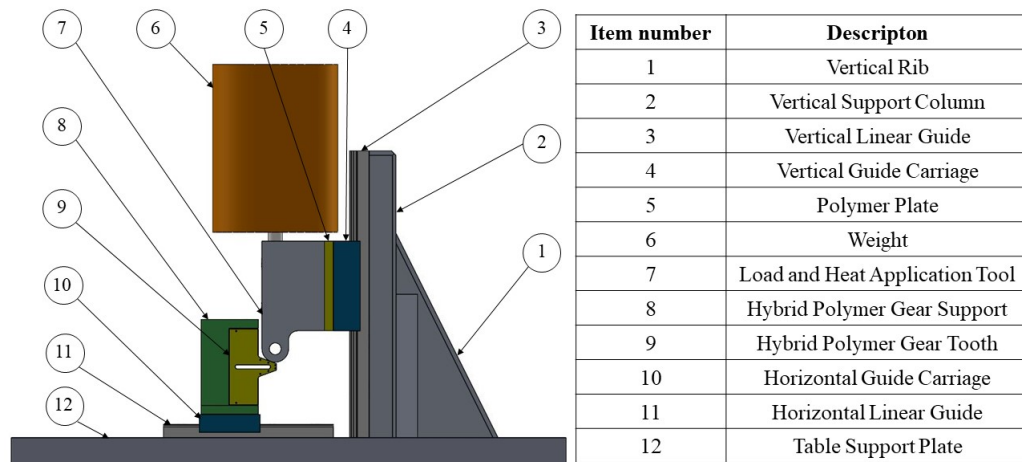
Initial 3D design of the gear tooth heating and loading system, and respective part list.
